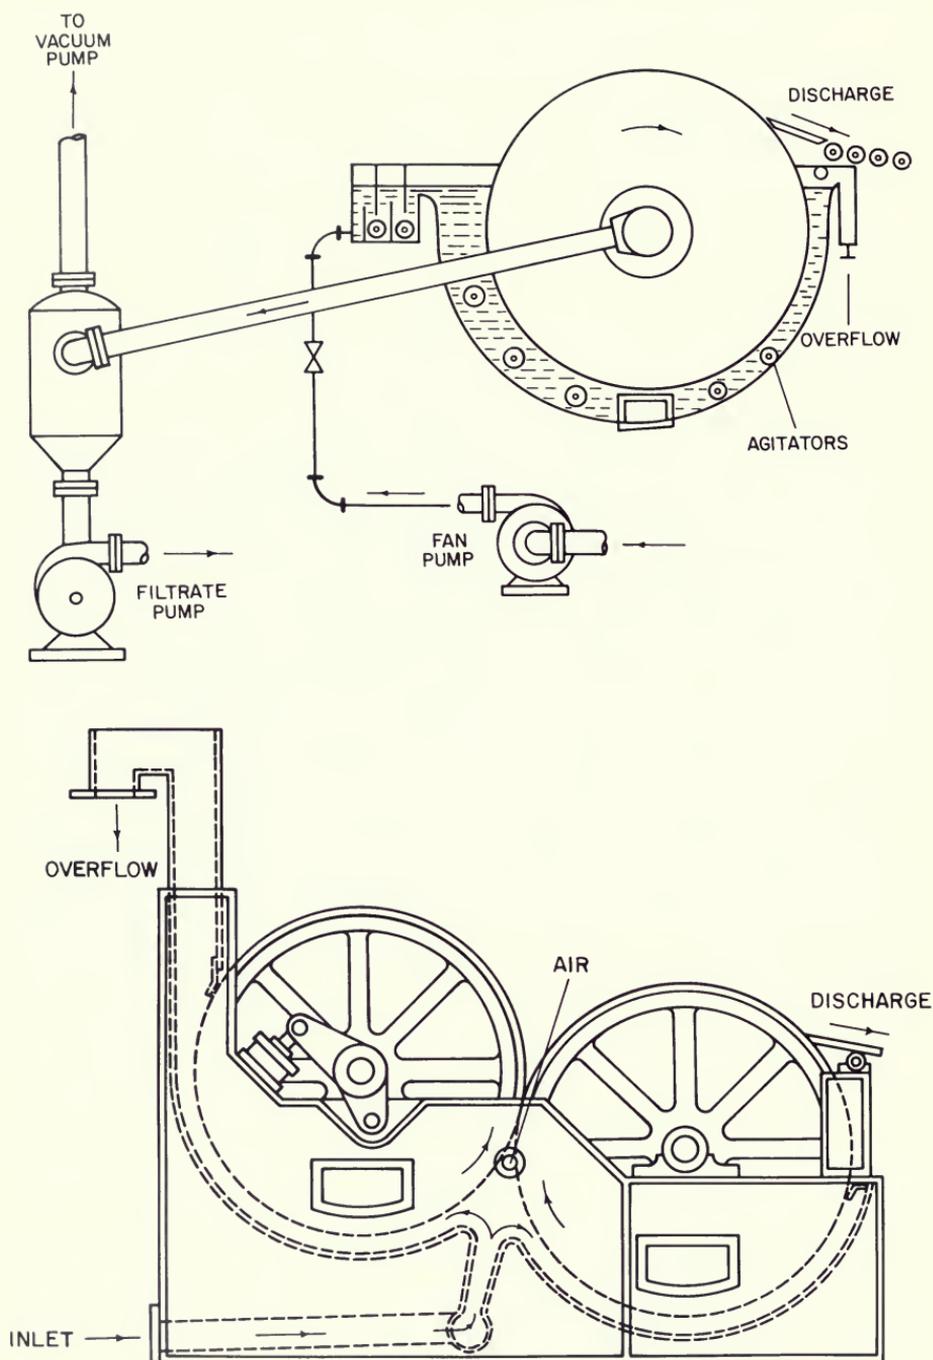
Cylinder forming machines. (Top) Single-cylinder vacuum-forming machine. (Bottom) Double-cylinder gravity-forming machine. (Drawing after Lyall 1969.)
